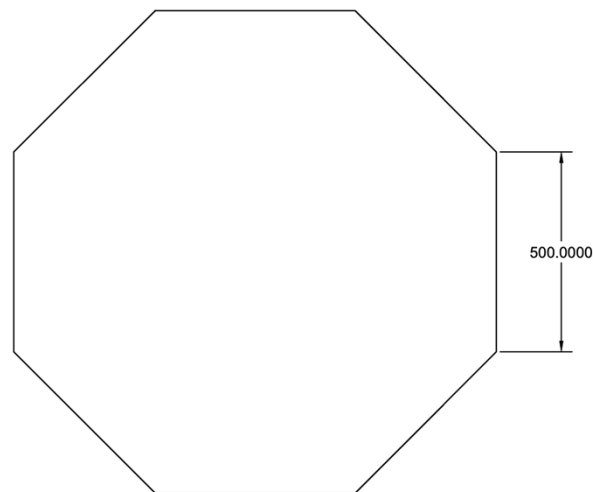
Technical drawing of the printed octagon, dimension in mm
